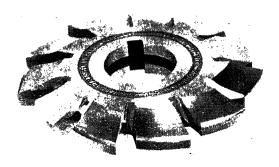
Formed profile milling cutter. It is used to produce gear teeth V grooves, surfaces of special shape, and the like. (Brown and Sharpe.)
